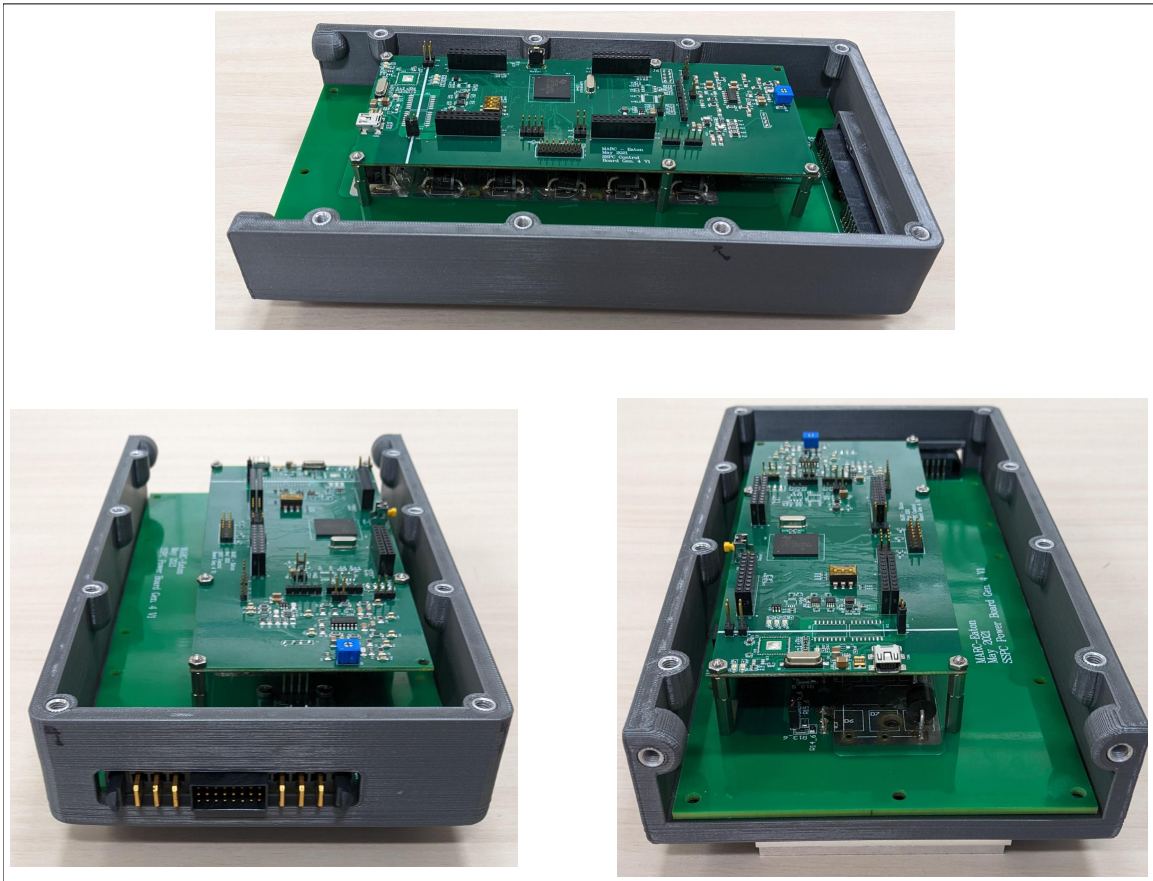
Assembled SSPC Board stack with 3D printed enclosure.
